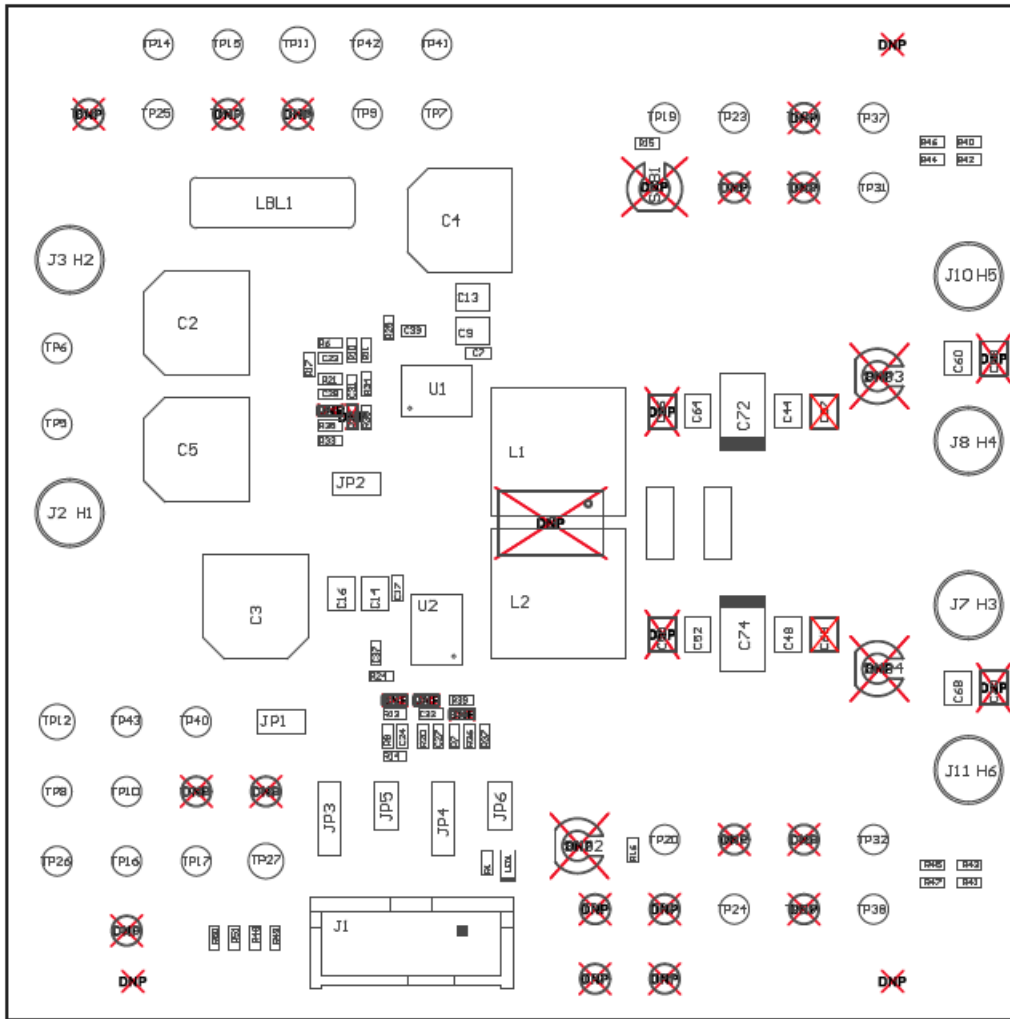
TPS546C23EVM2-746 EVM Top Layer Assembly Drawing (Top View)
